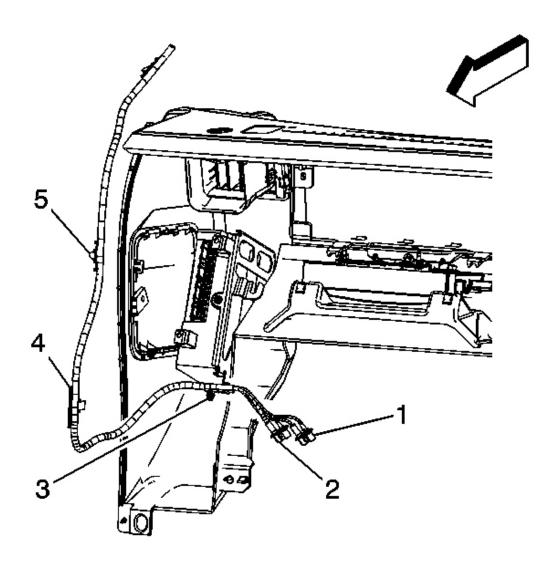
View Of Coax Cable & Components (UE1, U2K) Courtesy of GENERAL MOTORS CORP.
